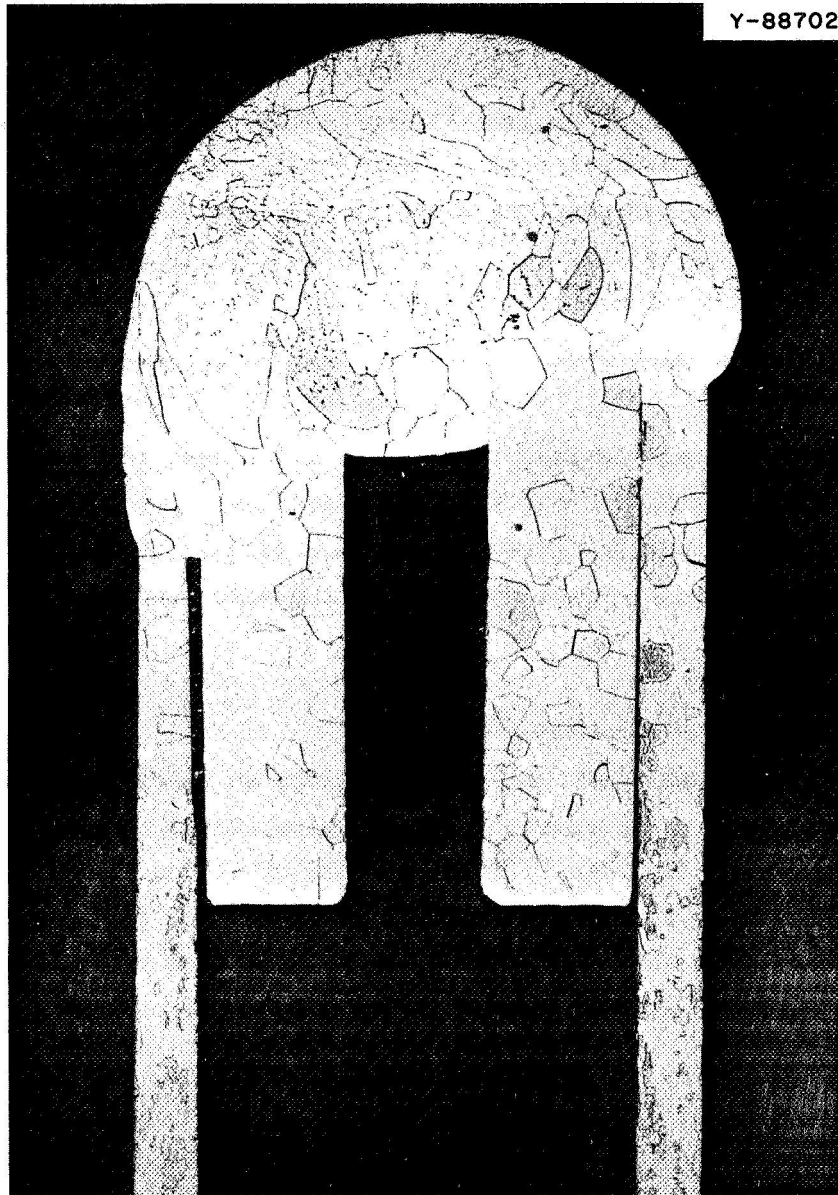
Photomicrograph of Plug Weld of a Fill Tube.
